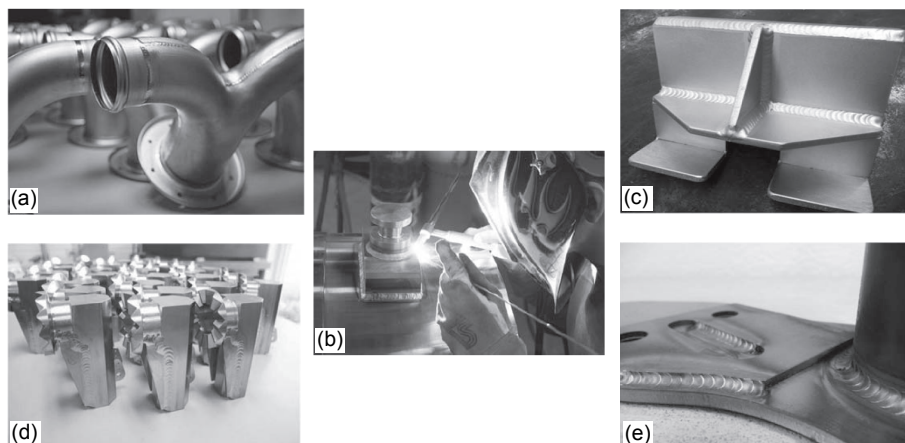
GTAW applications: (a) GTAW application to tubular assemblies (b) GTAW welding (c) Aluminum alloy welds (d) Welded titanium component (e) Chromium-molybdenum steel component [1]
